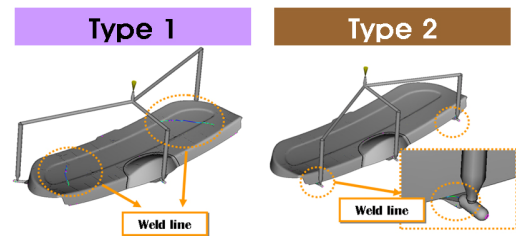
Results of injection moulding analysis for multi-steps injection technique (formation of weld line)
